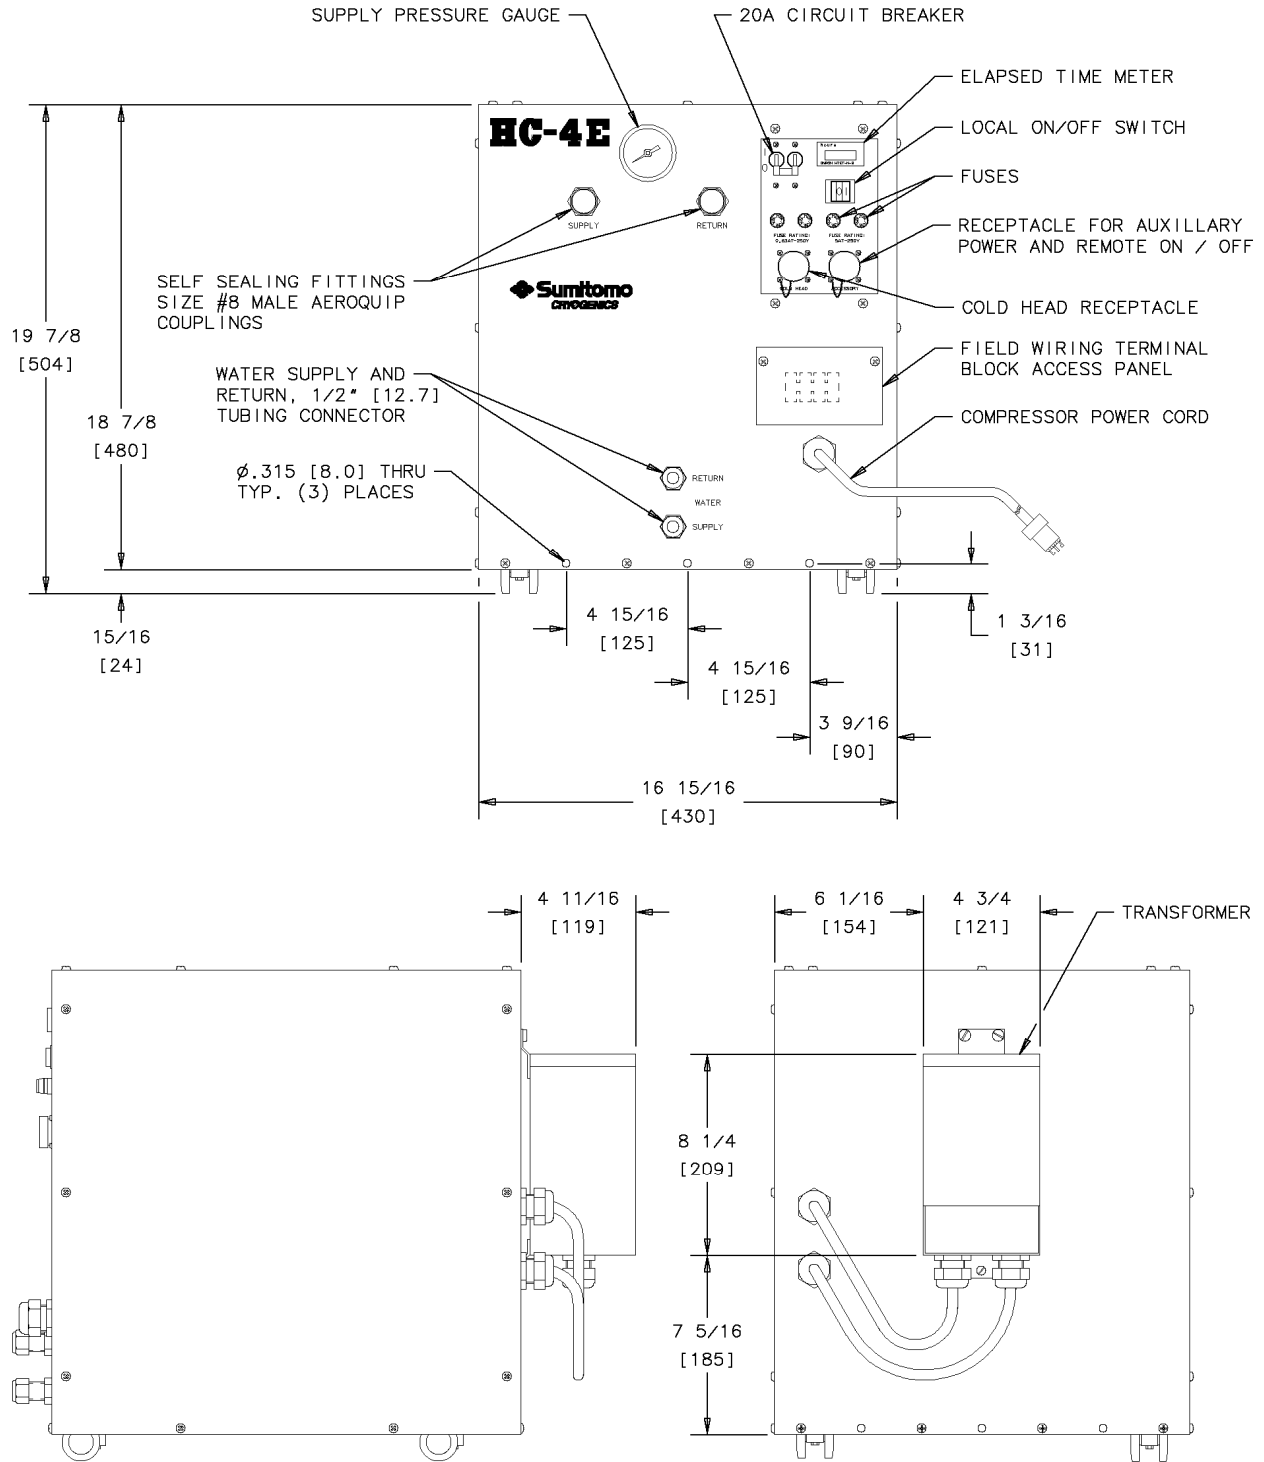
HC-4E1 Outline Dimensions and Parts Identification
